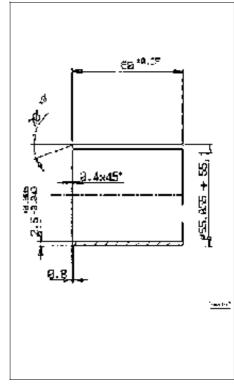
Nominal dimensions of layshaft Fig. 31 - Nominal dimensions of layshaft Fig 32 - Nominal dimensions of layshaft bush 2.1559.239.0 (all transmission versions).
